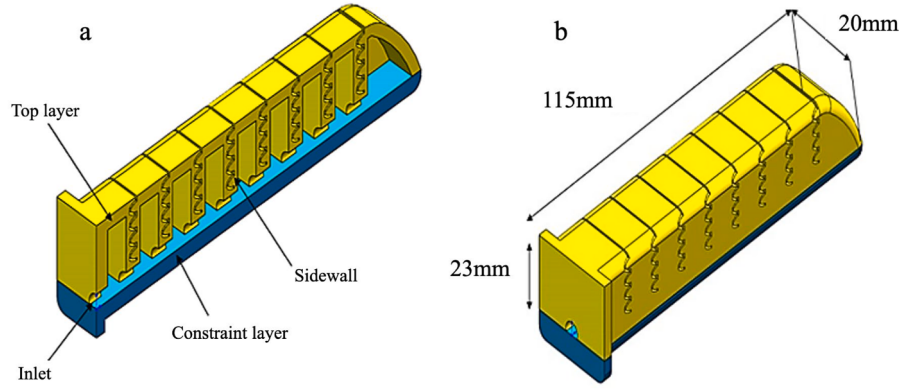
Single actuator model (a) Section view, (b) Whole view.
